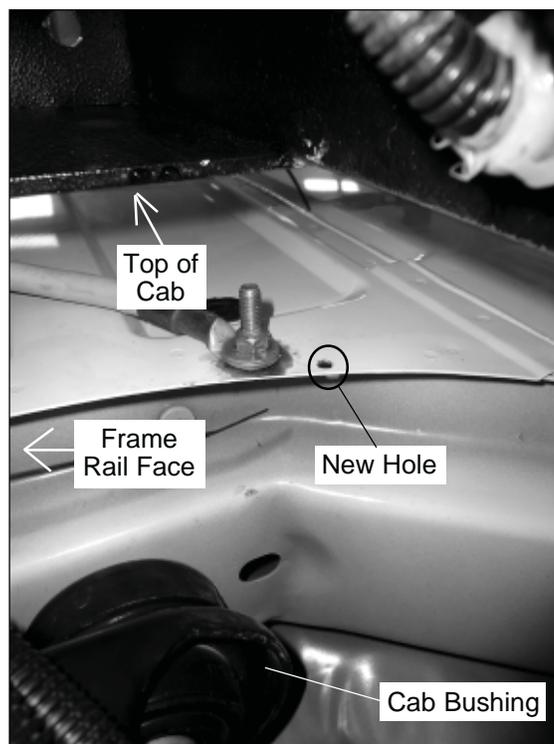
Hole On Bottom Rear Lip Of Cab (looking up from under chassis)
